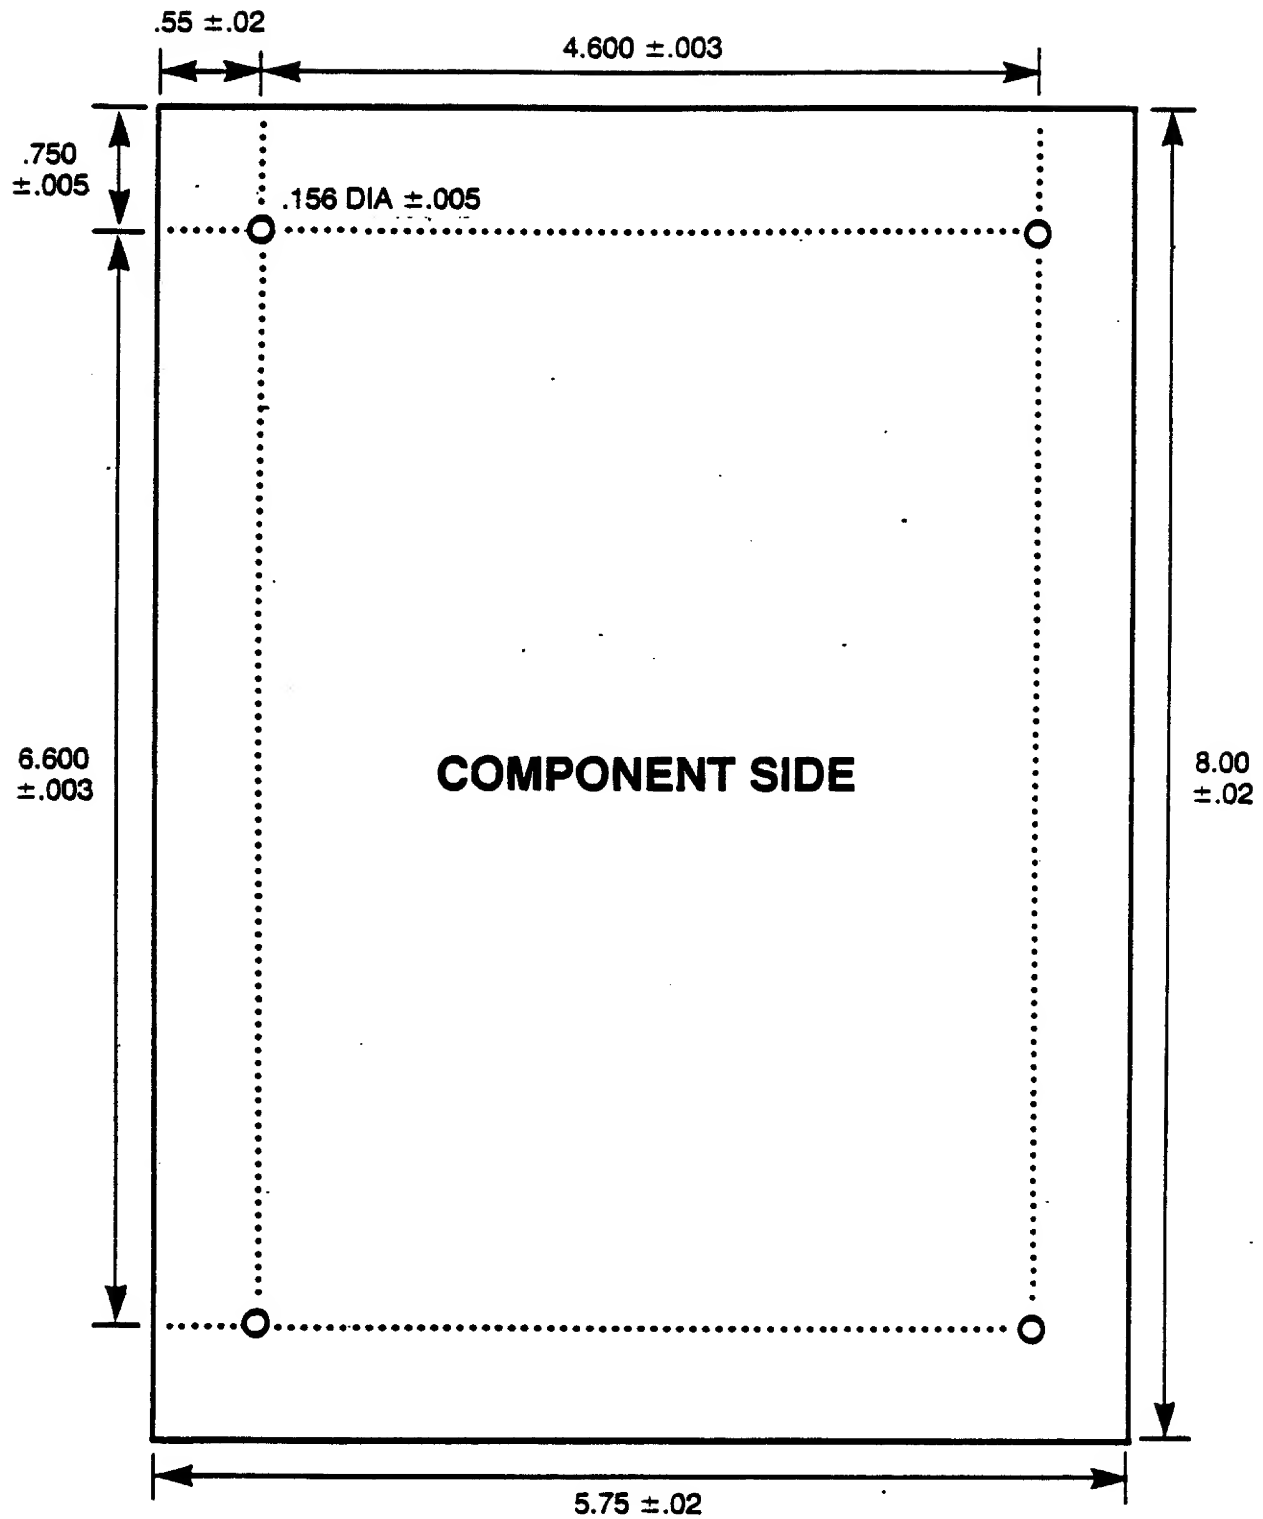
CONTROLLER BOARD DIMENSIONS
